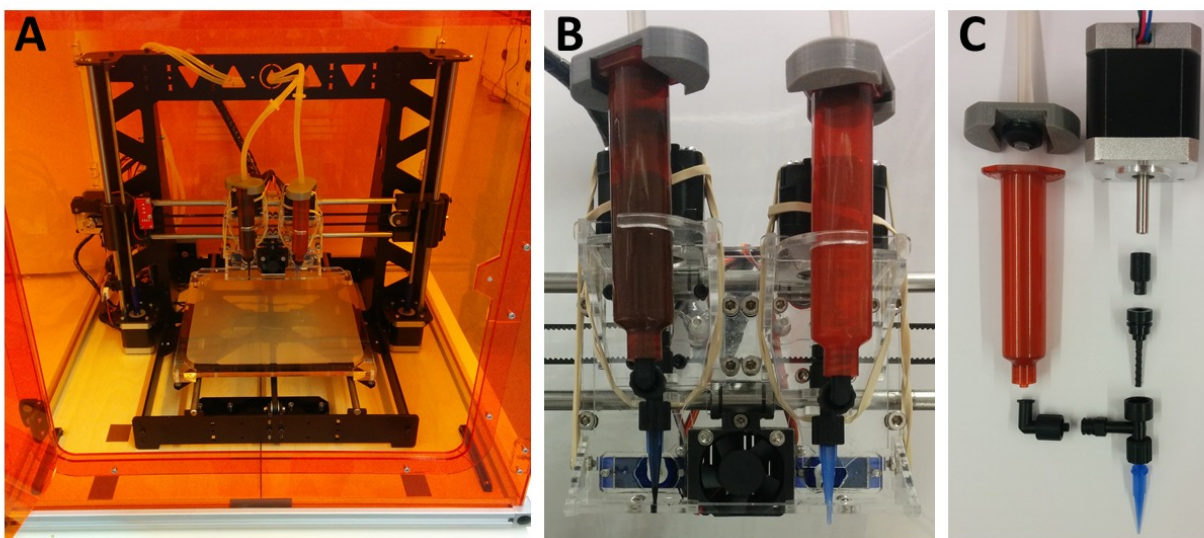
The 3D printer used in this work (A), inside its UV safety enclosure. The print head (B) uses two disposable auger valves (C) to dispense liquid silicone rubber or other viscous materials such as carbon grease. Material is held in 10 mL disposable syringes. The syringes are kept under constant overpressure between 100 mbar and 500 mbar to aid material flow to the auger valve.
